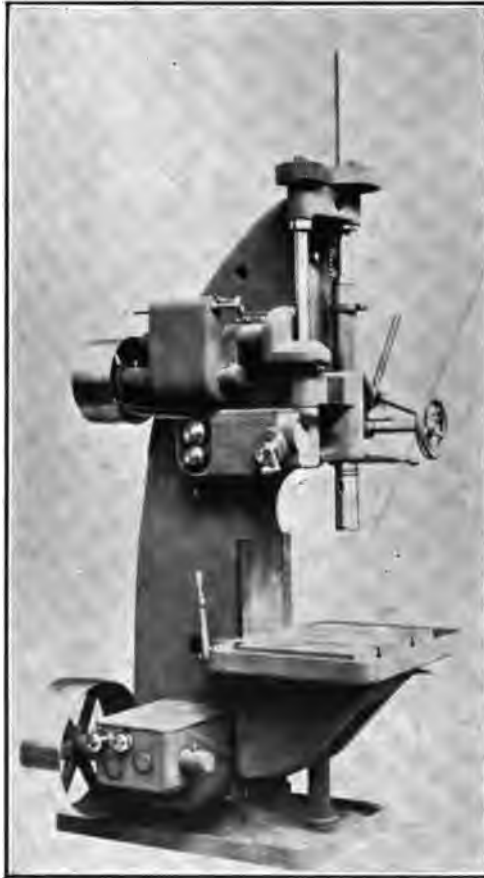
A drilling machine that fulfills the most exacting requirements for a high-speed, high-power tool. Made by Baker Bros., Toledo, Ohio.
